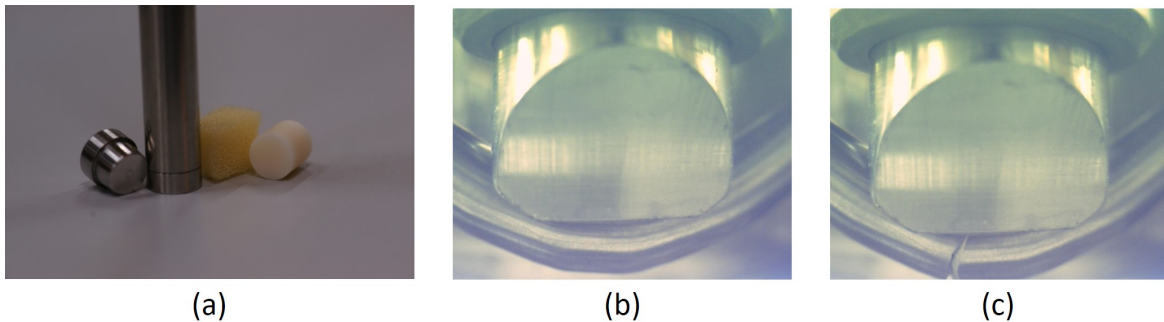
a) photograph showing the fresh cladding tube, alumina pellet, sponge filler and end-plug used for the sample preparation, b) rod deflection before fracture shaped based on pellets' positioning and c) cladding fracture under tension (bottom area) at the pellet-cladding interface closest to the loading axis.
